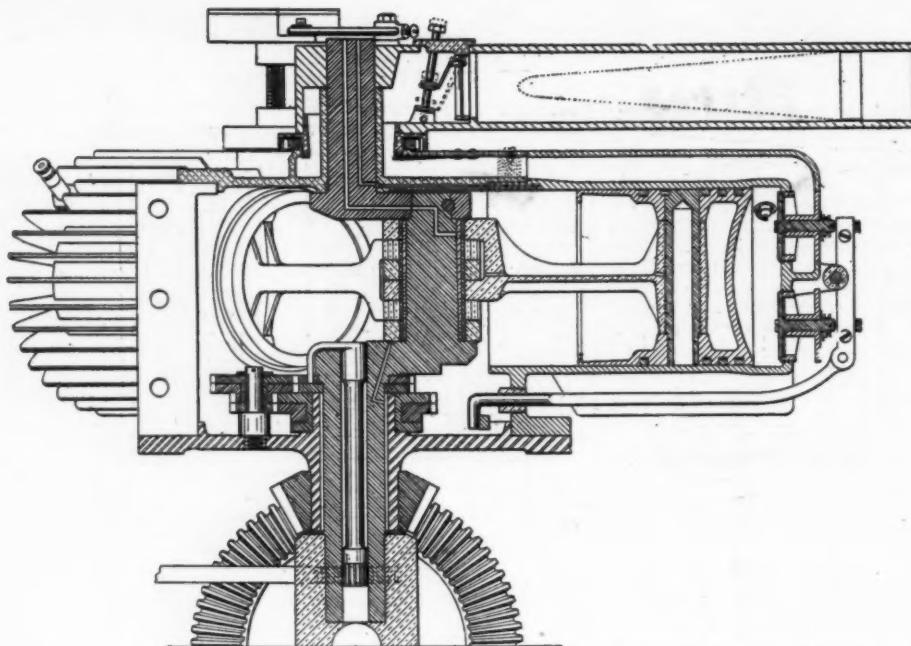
PART SECTIONAL DRAWING OF ONE-CYLINDER OF ADAMS-FARWELL MOTOR.
